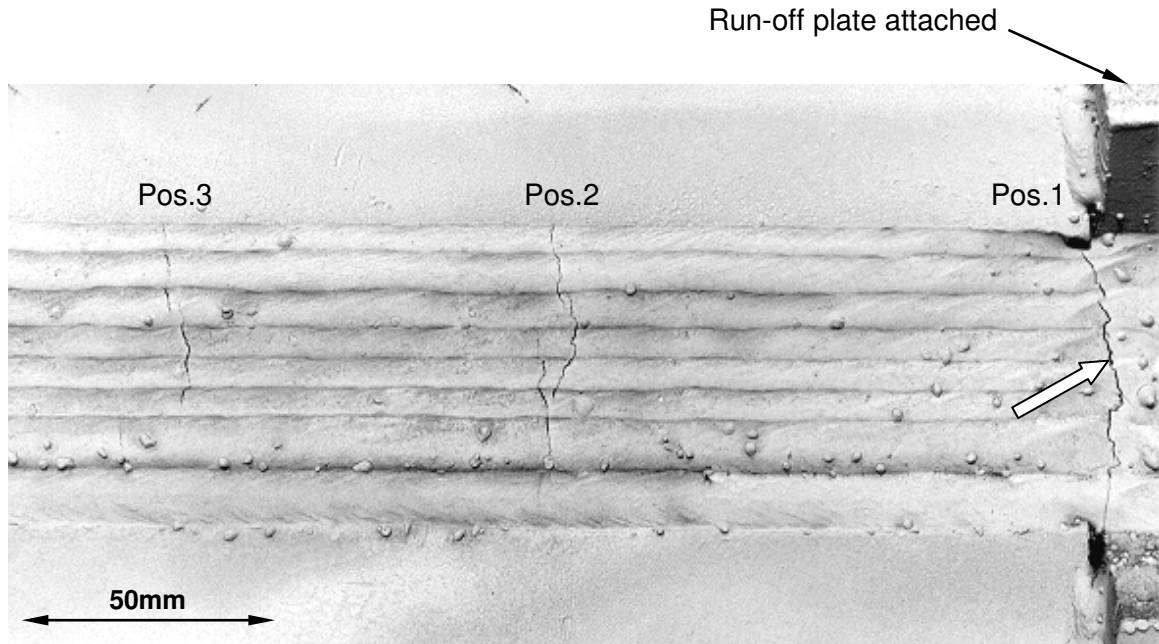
28 Photograph of typical transverse cracking in weld metal. Note position 1, where the hydrogen crack (arrowed) had initiated at the unfused land between run-off and 50 mm thick plate (after Kuebler et al. 2000).
